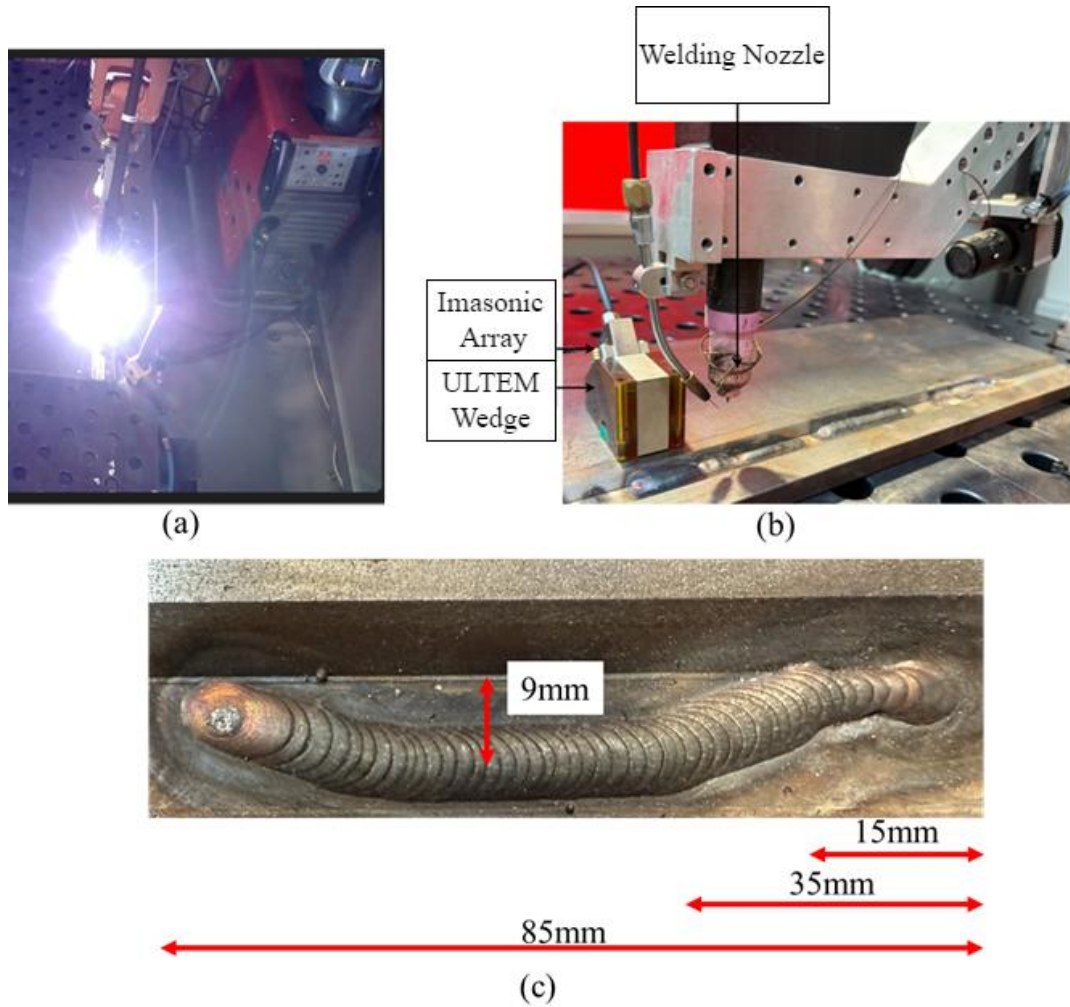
Composite view of in-process phased array experimental setup. (a) Robot-mounted TIG welding torch depositing a single bead during live ultrasonic acquisition. (b) Stationary ULTEM wedge housing a 5 MHz 64-element Imasonic probe positioned 20 mm. (c) In-process experiment with defect generation
